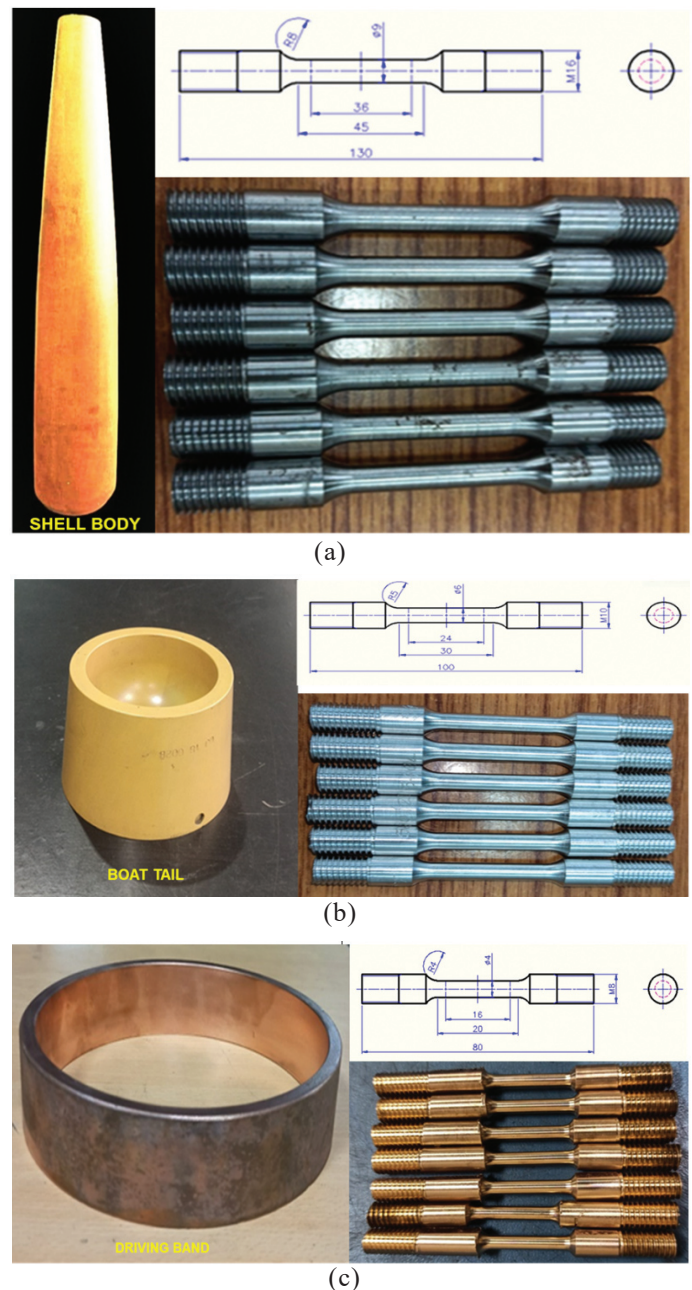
Projectile components: (a) Shell body - AISI 9260 & tensile test specimens; (b) Boat tail - Al alloy 7075 T6 and tensile test specimens; (c) Driving band – CuZn10 and tensile test specimens.
